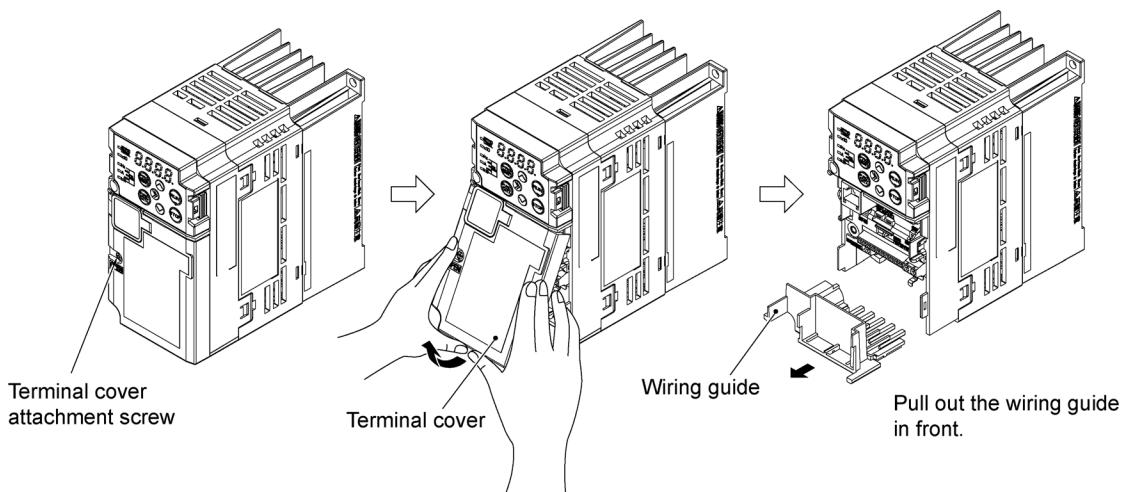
Removal of the Terminal Cover and the Wiring Guide (for FRN0006E2S-2□)
